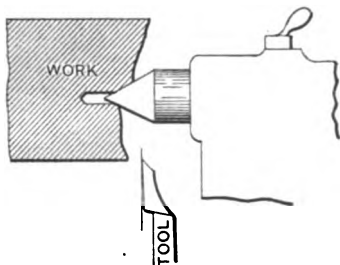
Improper Bearing in Center of Work not Faced before Turning.
